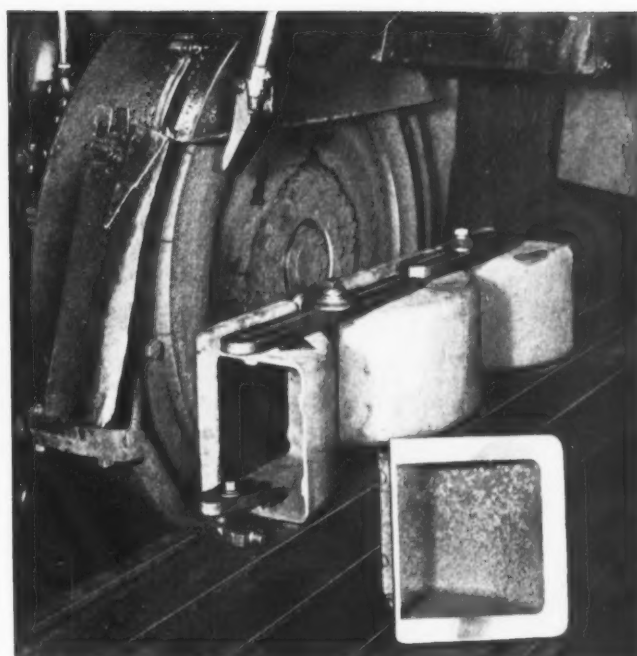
A Rough-grinding Operation is Performed on Cast-iron Guards to Obtain a Level Mounting Surface
